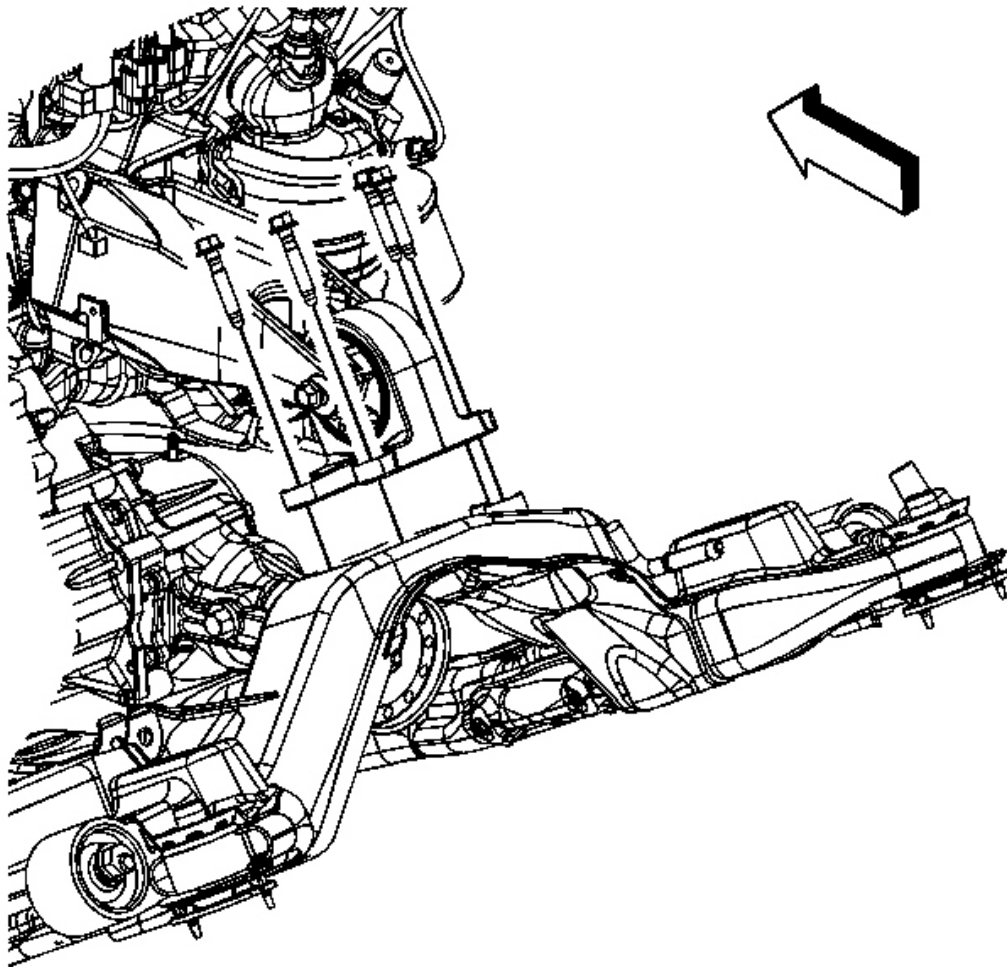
Rear Transmission Mount-To-Frame Bolts
